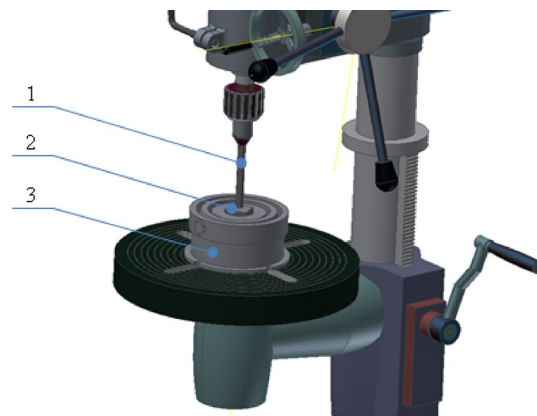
Setup for determining the linear wear of samples under end-face friction: 1 – hollow fluoroplastic cylinder counterbody, 2 – rectangular test specimen, 3 – self-alignment fixture for the specimen.
